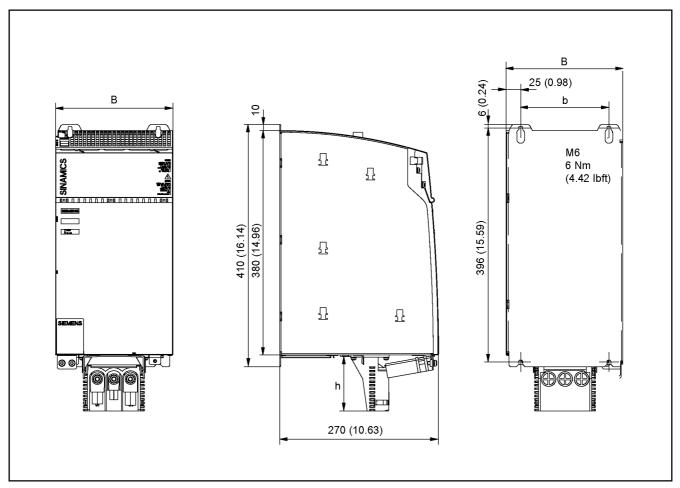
Dimension drawing of Active Line Module with internal air cooling (36 kW and 55 kW)
